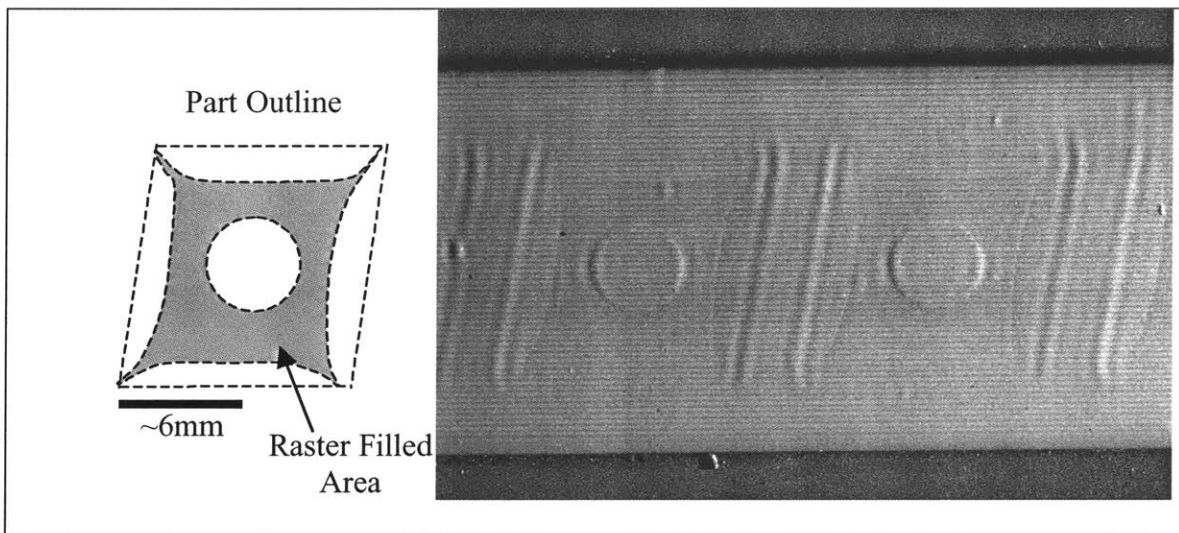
Top view of a WC-Co bed with printed cutting tool inserts. Low angle lighting shows the effects of differential slip casting.
